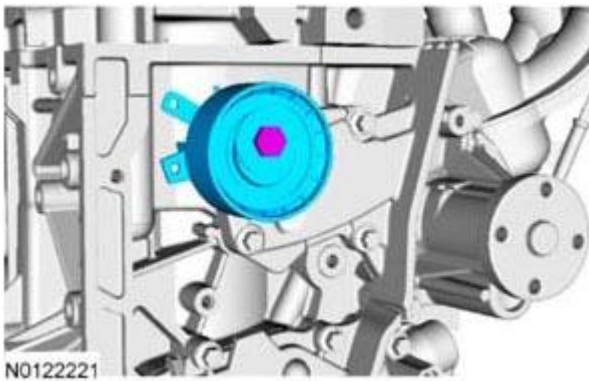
Identifying Bolt And Timing Belt Tensioner
